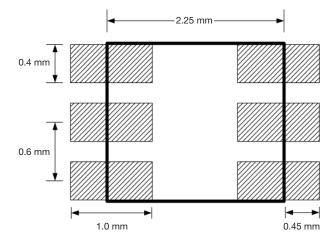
VEML6070 OPLGA PCB Layout Footprint
